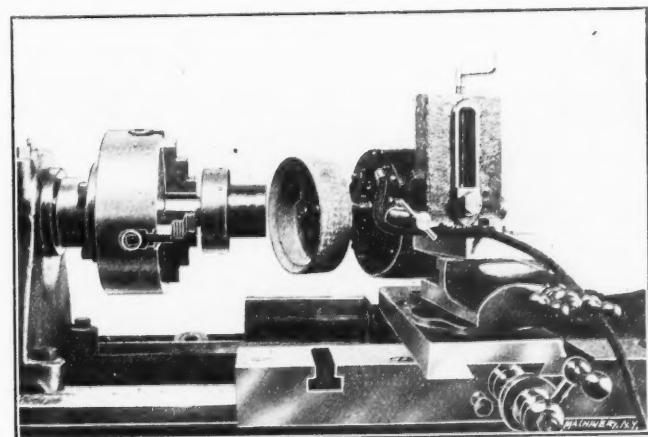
Grinding a Punch with a Cup Wheel to give Shear.
